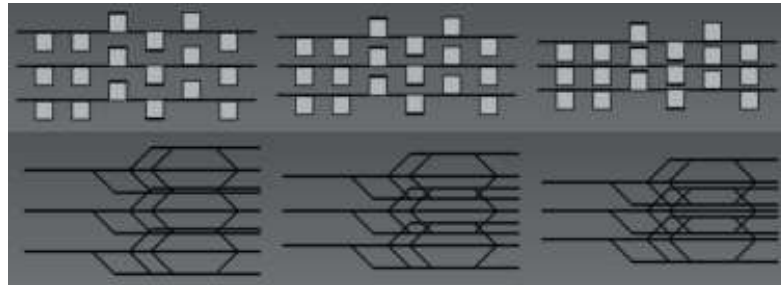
Side views of the stacked fins in z-axis (upper drawing) and in x-axis(lower drawing) to see the distribution of the slits starting with highest fin pitch on the left
